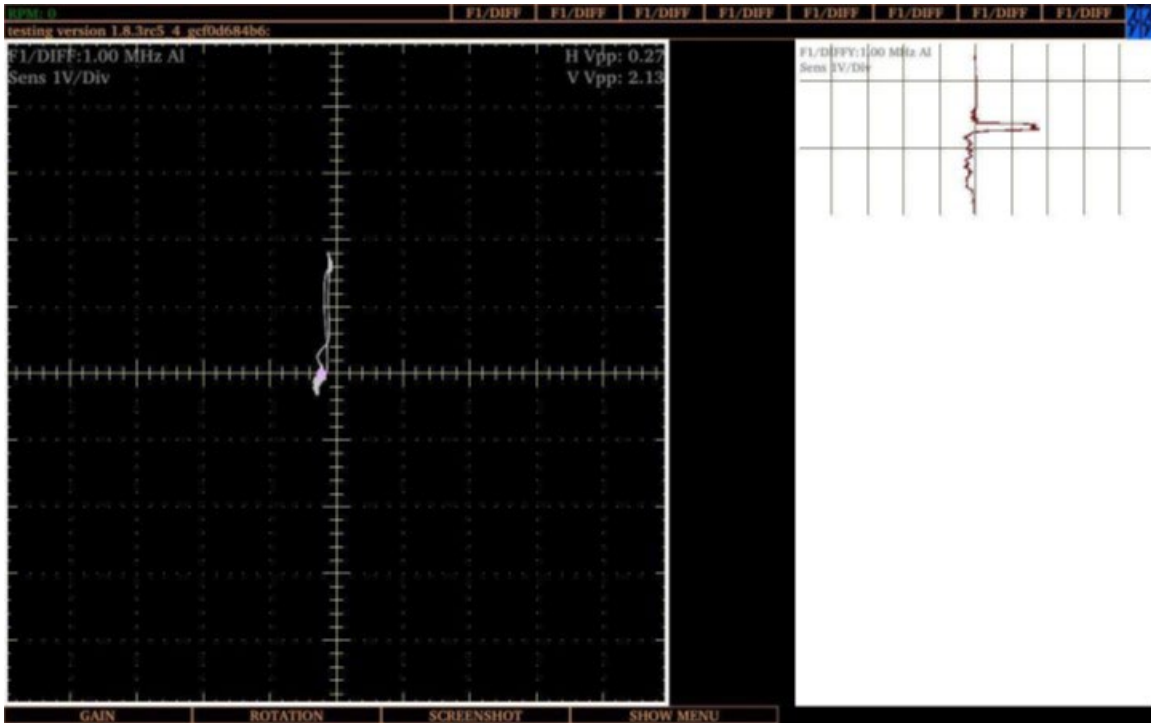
ET indication of defect at Location A in butt weld test panel TTCl-2
